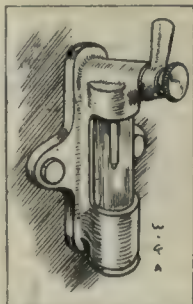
The Darracq adjustable sight-feed on the dashboard.
